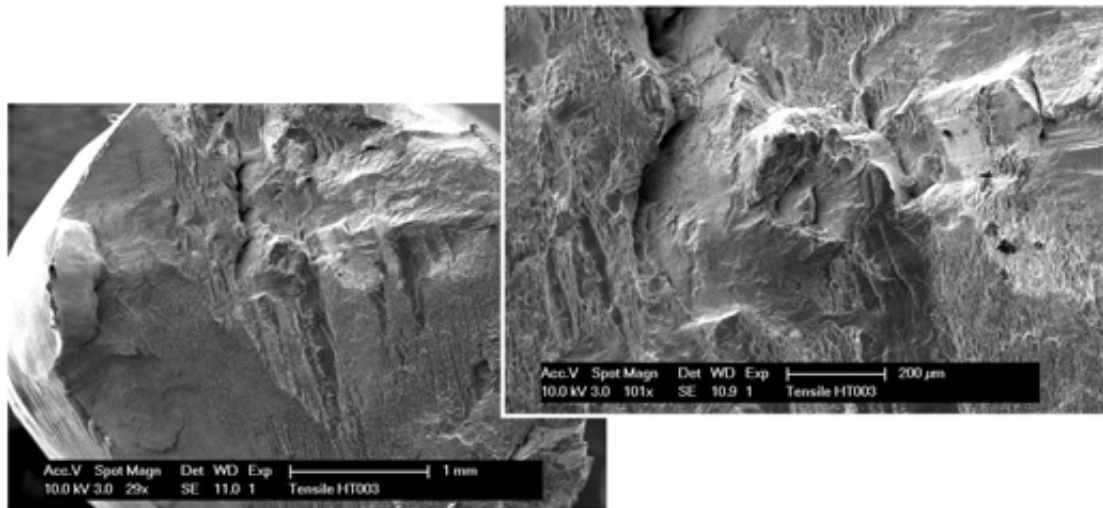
Ti6246 tensile specimen HT003 fracture surface
